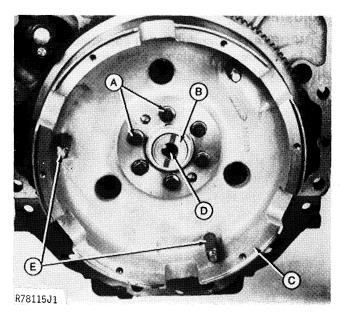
Flywheel Bushing Assembly (8630-right-hand side/8430-left-hand side)
